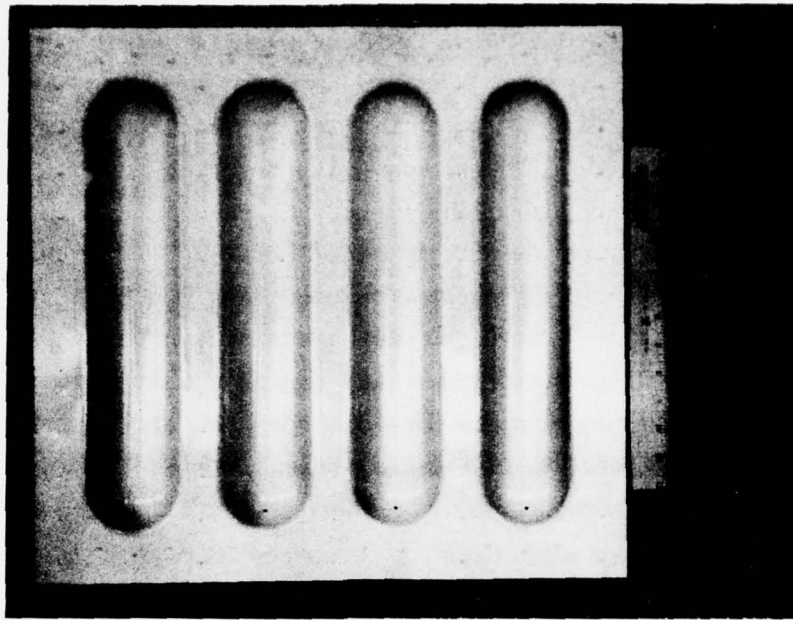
FLAT STRUCTURAL WELDBONDED TEST PANEL
